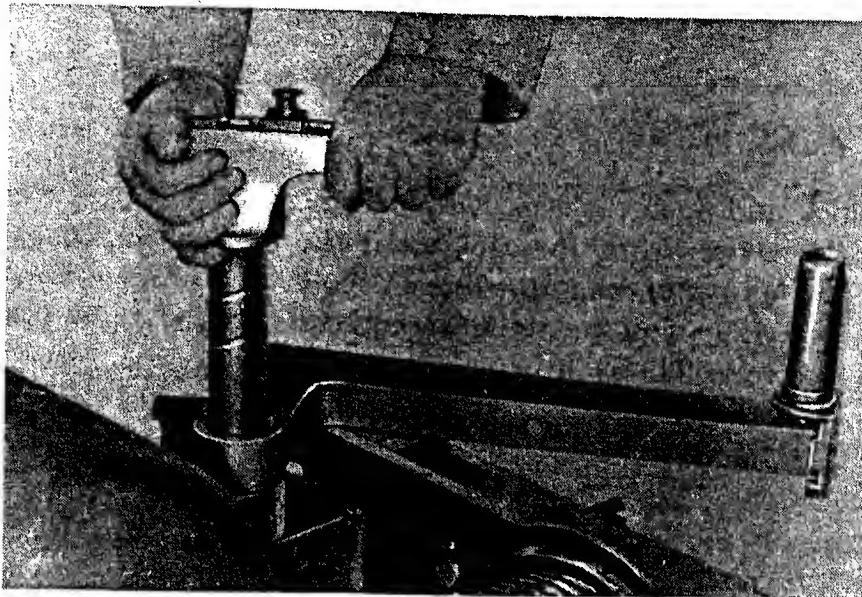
Installing the firing mechanism housing (with safety plunger in place), and obturator spindle assembly
